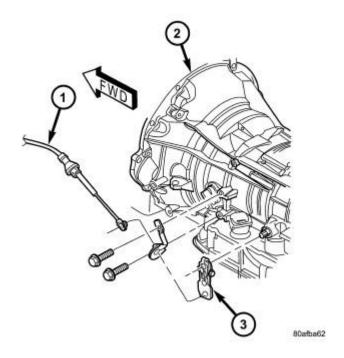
Gearshift Cable, RFE Transmission & Manual Lever Courtesy of CHRYSLER GROUP, LLC
